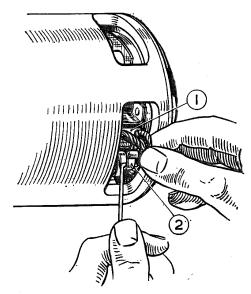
Checking brushgear 2 Brush Spring 1 Brush
